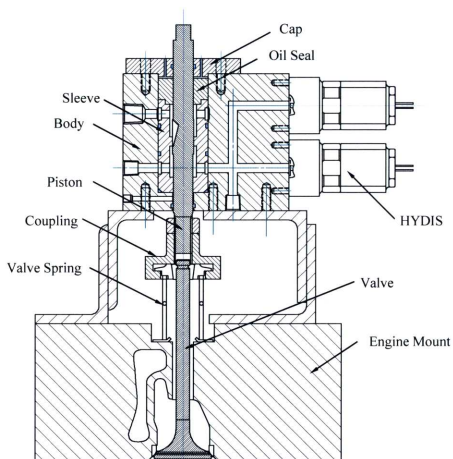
Cross-sectional view of the electro-hydraulic valve actuator with a hydro-mechanical feedback slot
